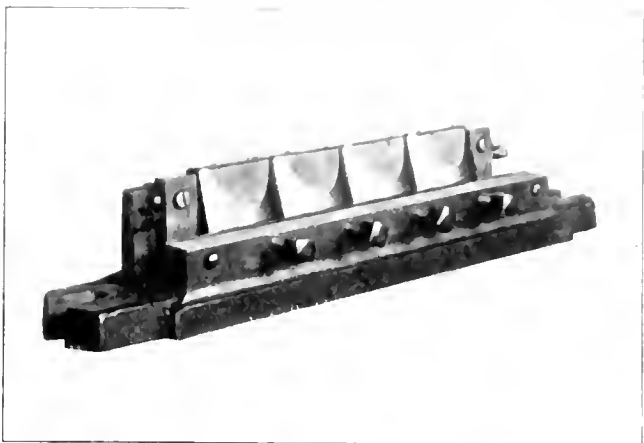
Fixture for Holding Jaws while Milling the Bevel
